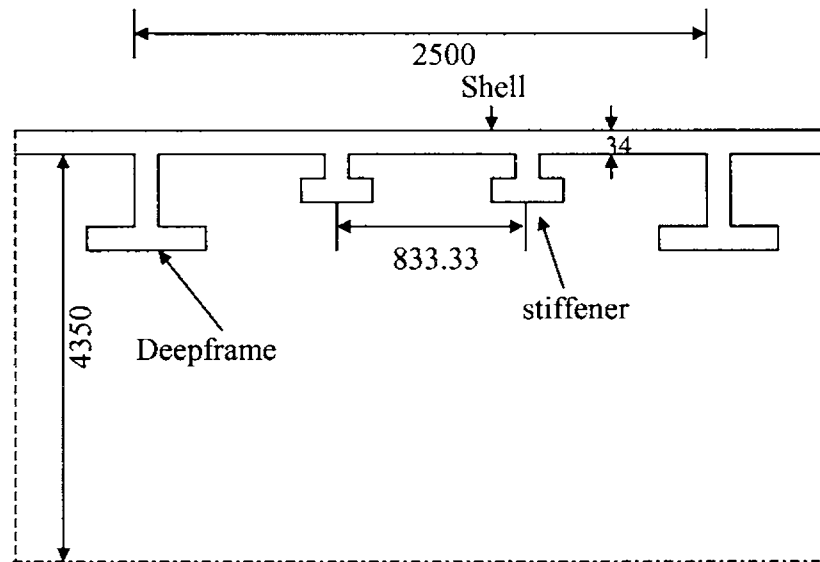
Stiffened cylindrical shell of M2 with deepframes (all dimensions are in mm)
